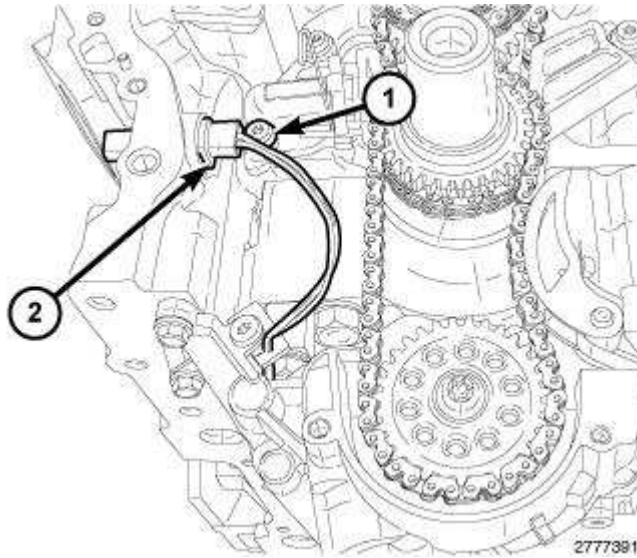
Oil Pump Solenoid Electrical Connector & Primary Chain Tensioner Mounting Bolt
